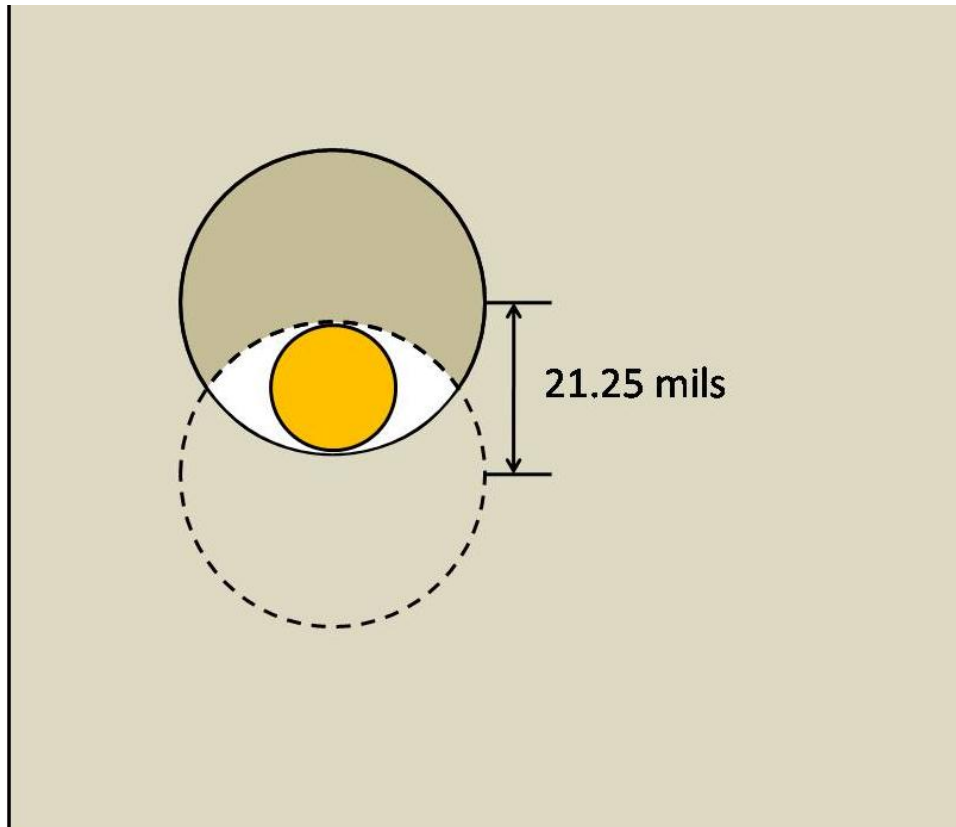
Top view looking down alignment hole. Maximum plate offset is 21.25 mils when the wire is not touching the bottom hole.
